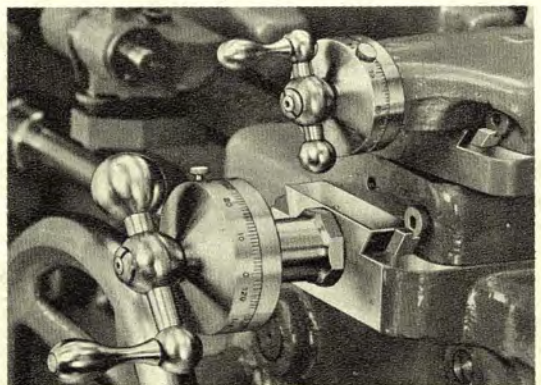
Easy-reading Graduated Dials, Swivel Machine Handle, and Taper Gibs used on 10"-1" Collet and larger South Bend Lathes
